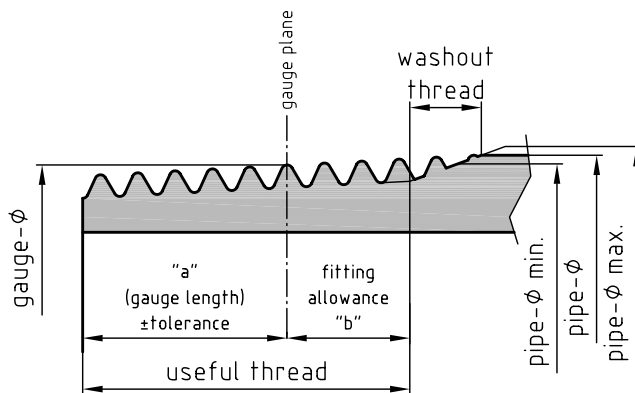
Care must be taken that the useful thread length allows the external thread to be screwed in, to achieve adequate compression and sealing, even when the external thread is at the maximum permitted gauge length.
